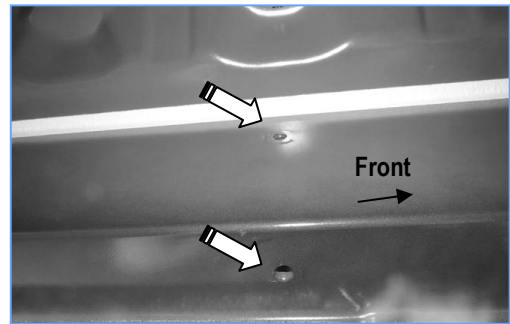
Remove Plastic Plugs To Uncover Threaded Inserts
